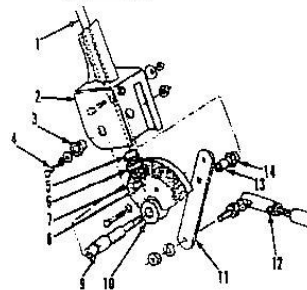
Exploded view of steering gear assembly used on Model 965A.
